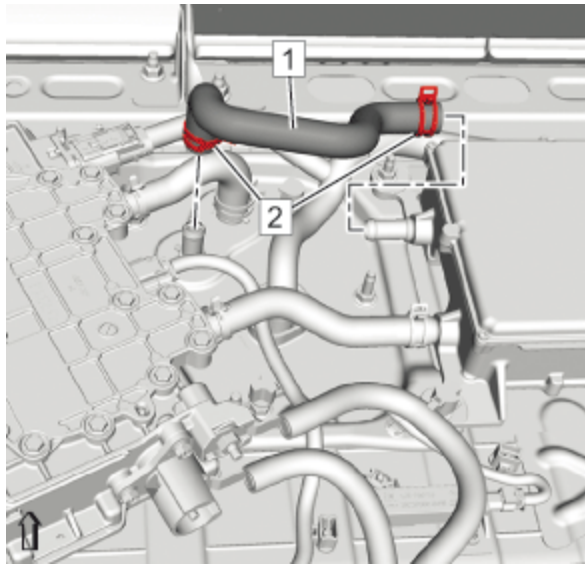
Clamp And Generator Control Module Coolant Tank Hose
